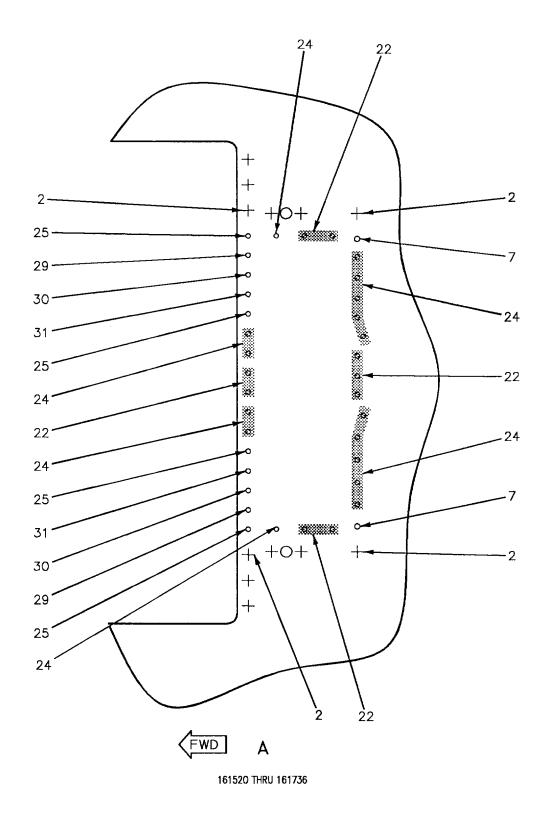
Skin, 74A313055, Fastener Index (Sheet 3)
